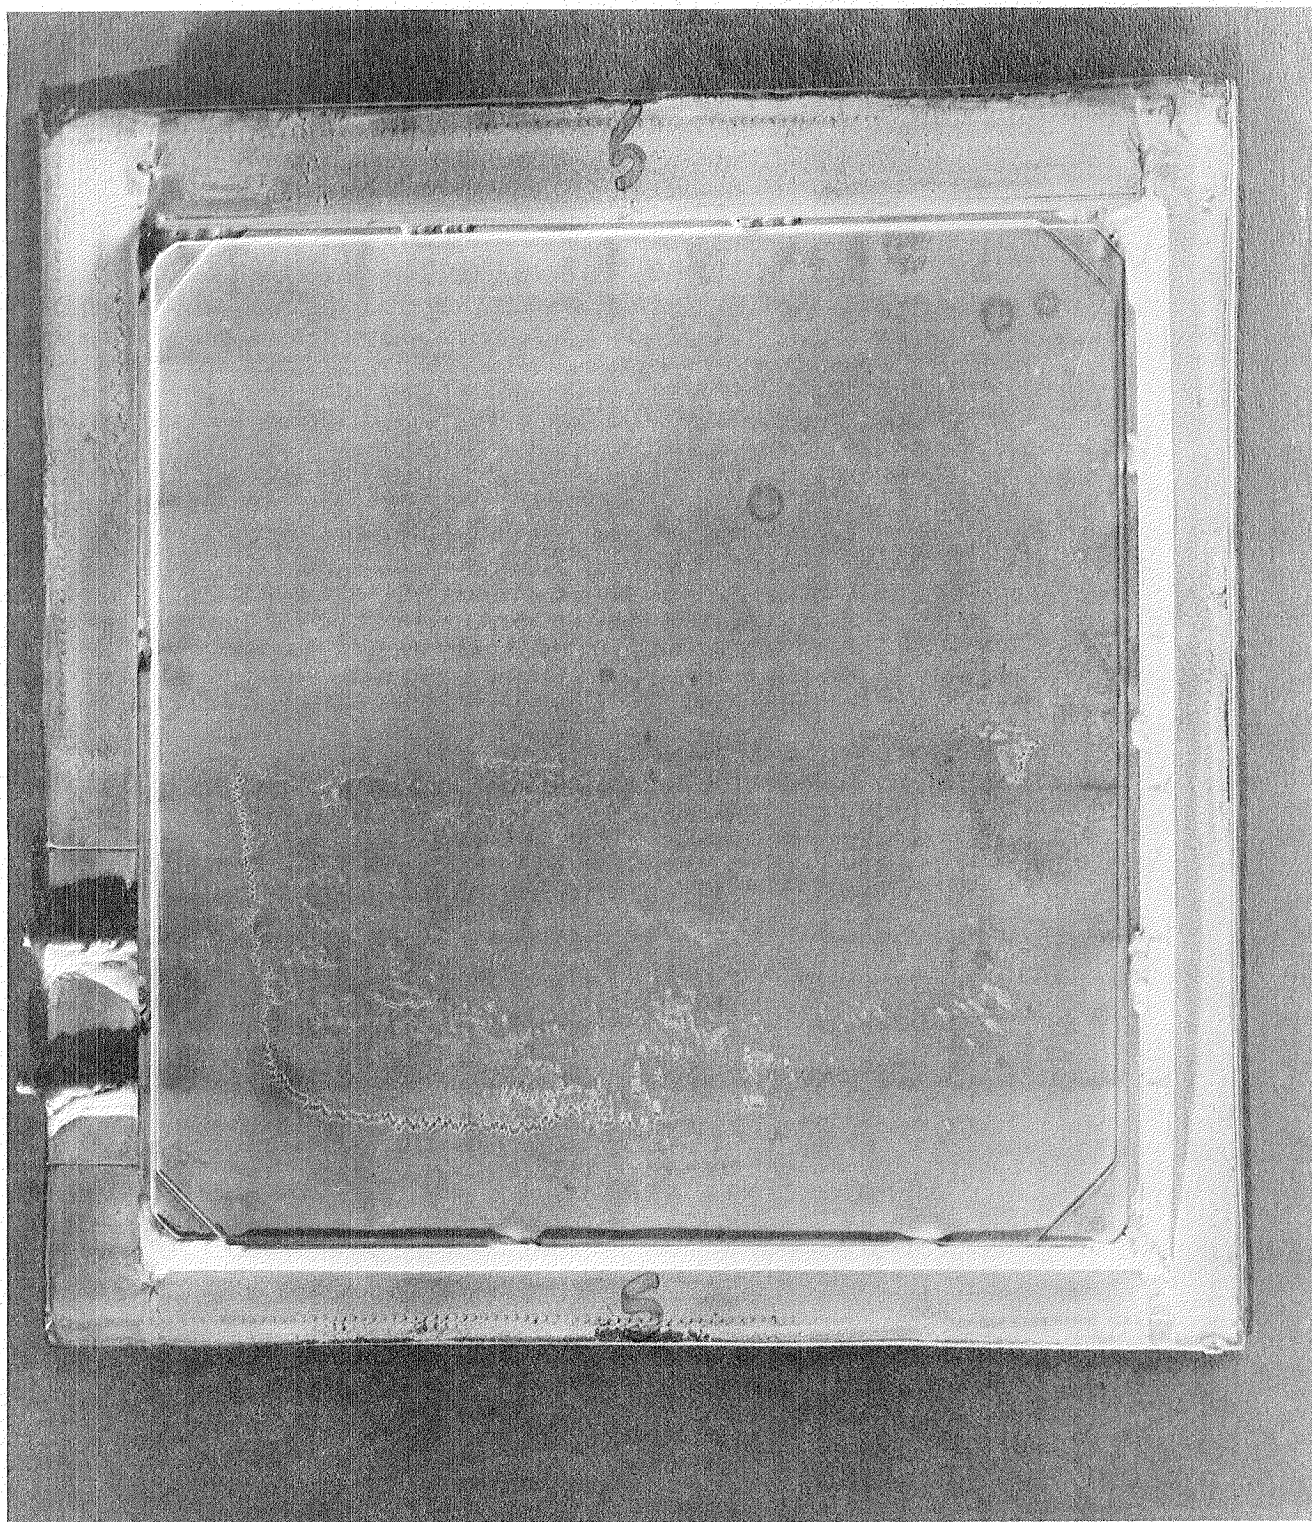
PANEL NO. 5 BOTTOM FACE SHEET
